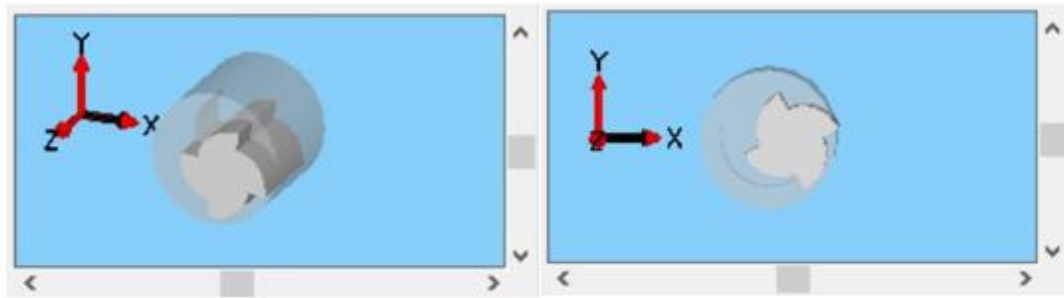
Illustration of Helical Milling provided by TXF Cut Data tab: isometric view (left) and X-Y view (right). Helical milling involves following a circular toolpath in the X-Y plane while simultaneously feeding into the material (Z-direction), creating a helical or spiral toolpath.
